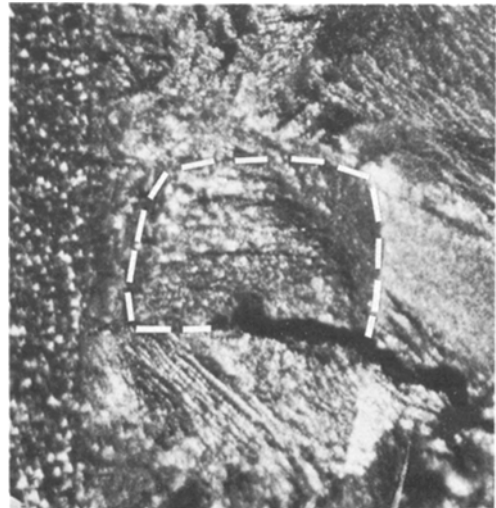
Fatigue crack surface below spark-machined notch.
